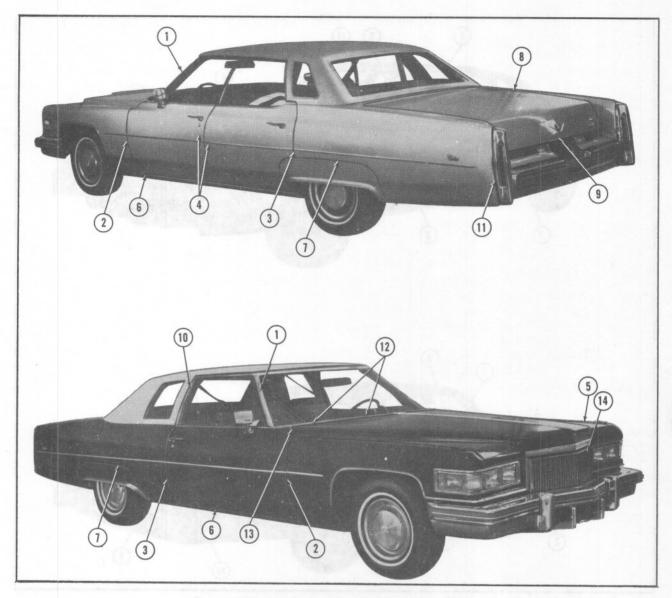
Sheet Metal Tolerances (Except Eldorado)
